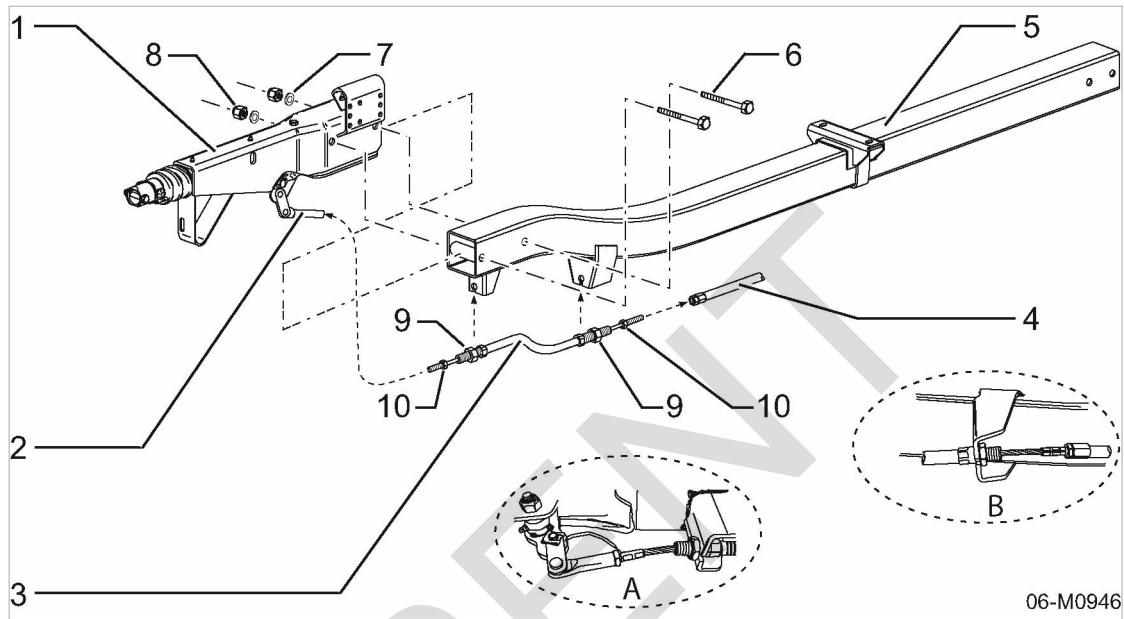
Fitting the overrun braking mechanism of the non-adjustable towbar
